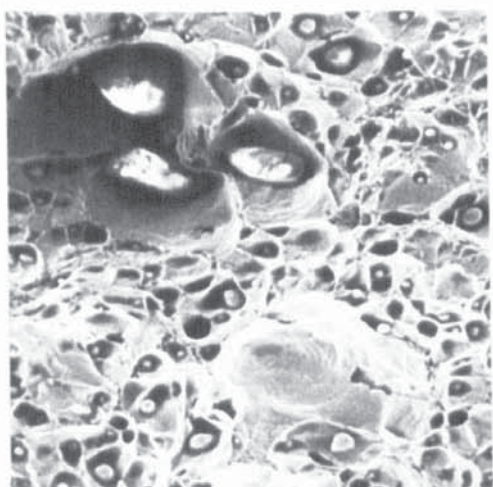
a. Ductile fracture surface, Steel D10, 500X.
